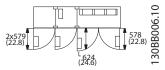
Front Clearance of IP21/IP54 Enclosure Type, Frame Size F4
